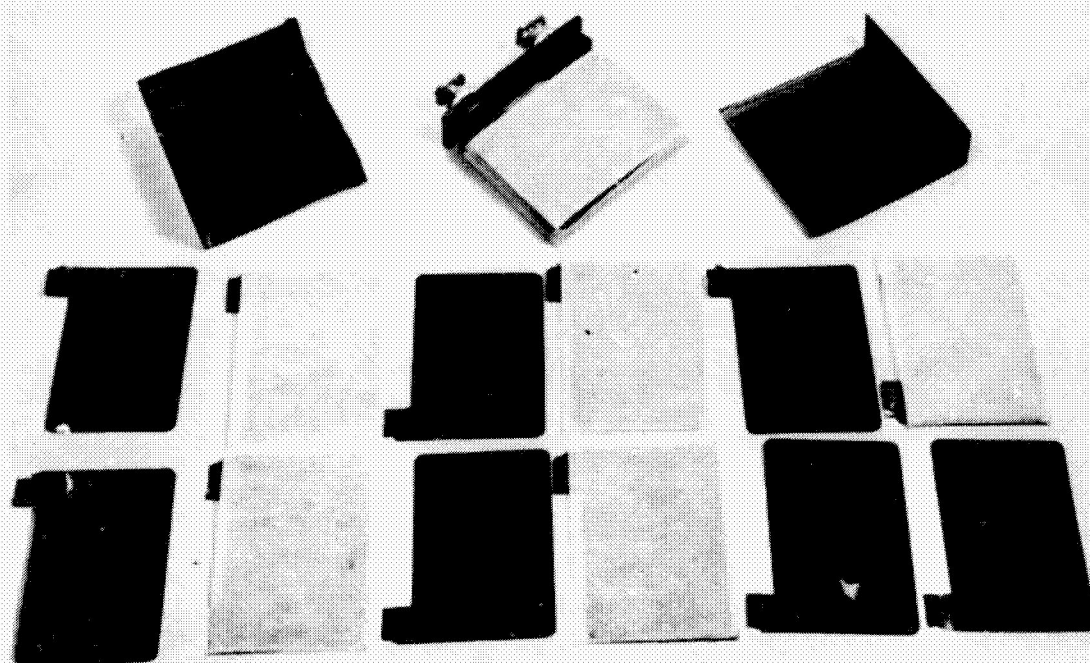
Cell Plate Pack with Broken Plate Weld Tabs
